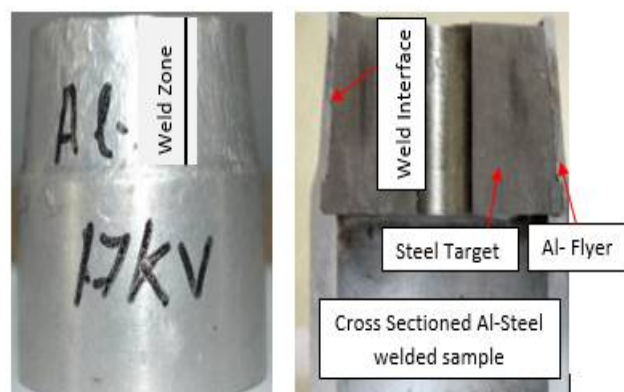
Welded and Cross-sectioned Al / SS Tubular sample
